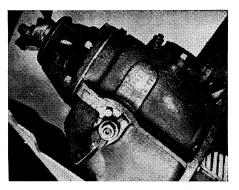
The round type eccentric stop pin (where used) should be replaced with hex type to simplify lever adjustment for shift fork clearance
